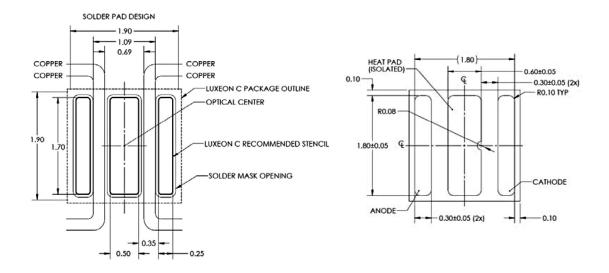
Recommended PCB solder pad layout for LUXEON C Color Line.
